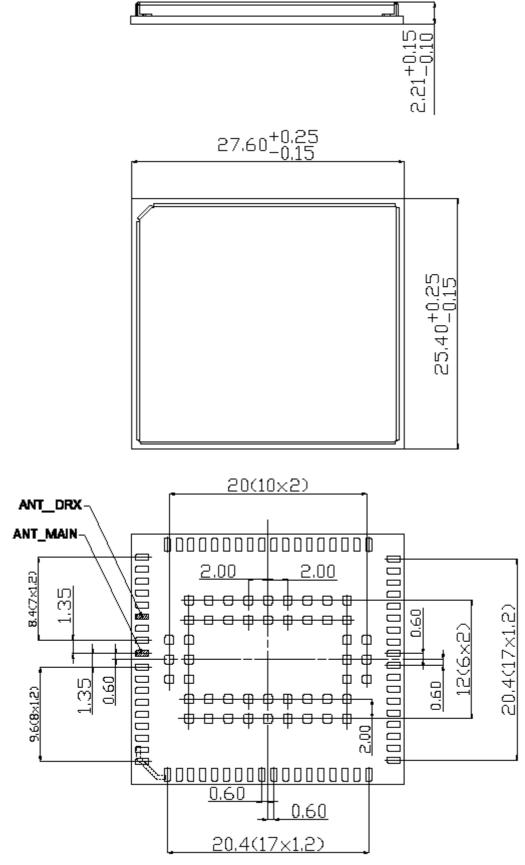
Dimensions of ELS61-US (all dimensions in mm)
